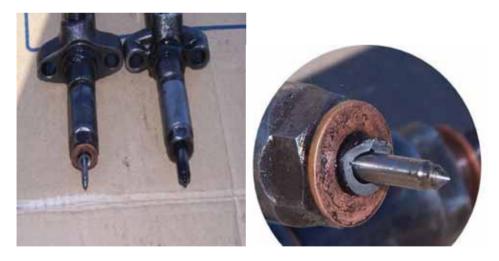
An example of damage (breakaway) of a part of the atomizer body caused by the improper quality of fuel
